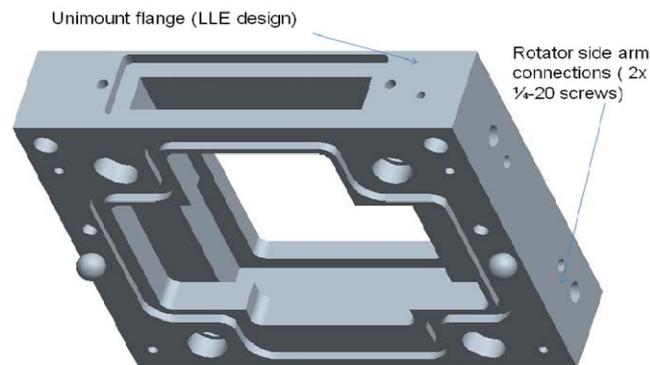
Unmount Flange 1/4-20 screws connections with Rotator Side Arm
